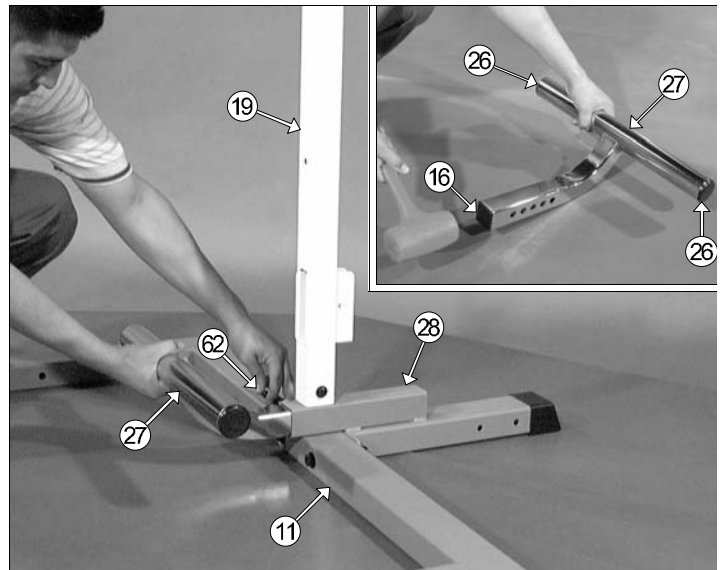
Locate the Bottom Assembly Holder (#28) and, using a rubber mallet insert one Plastic End Cap w/Groove 2 x 3 (#8) onto the tube-end. Next, attach the Bottom Assembly Holder (#28) to the Base Frame (#11) in the position as shown above, and secure it into place using two Hex Head Cap Screws 1/2-13 X 4 1/4 (#12), four Flat Washers SAE 1/2" (#10), and two Nylon Insert Lock Nuts 1/2-13 (#9).
